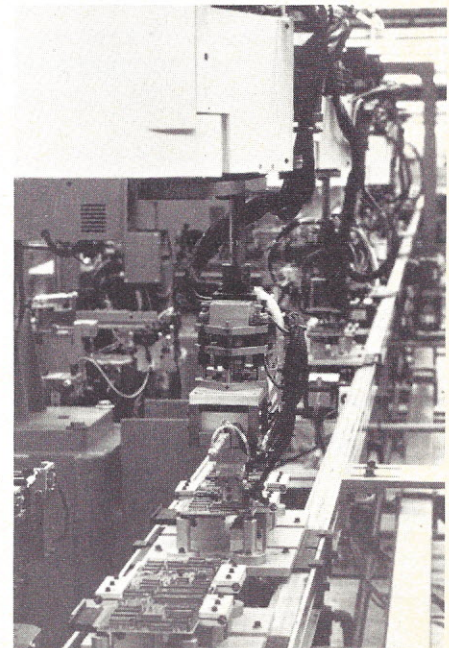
The multi-station circuit board assembly system includes feeding and lead-forming tooling for a variety of odd-form electronic components.
